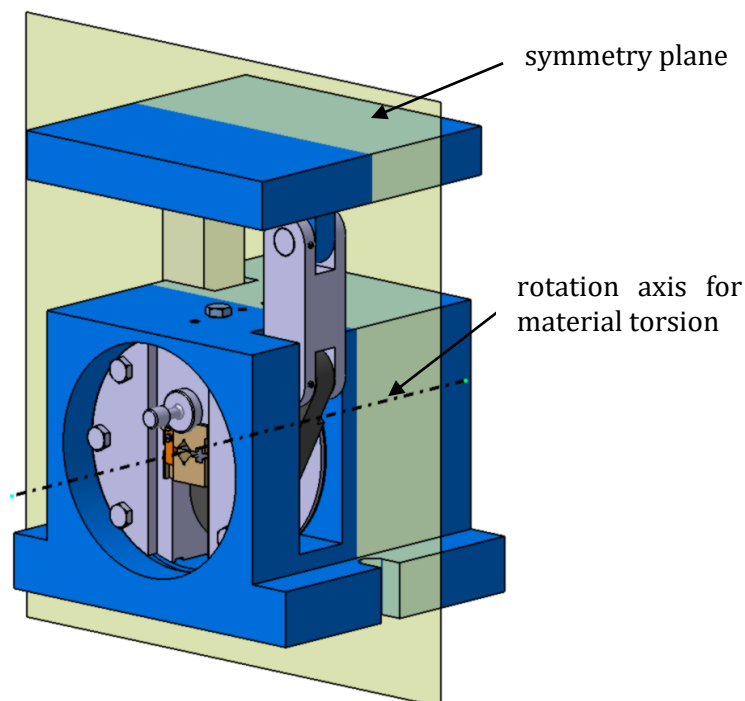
Isometric view of the device for metal bar precision shearing by material torsion
